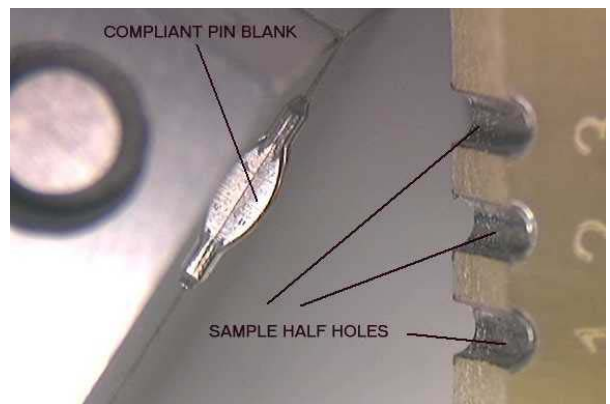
Clamp, Compliant Pin Blank and PCB half PTH
